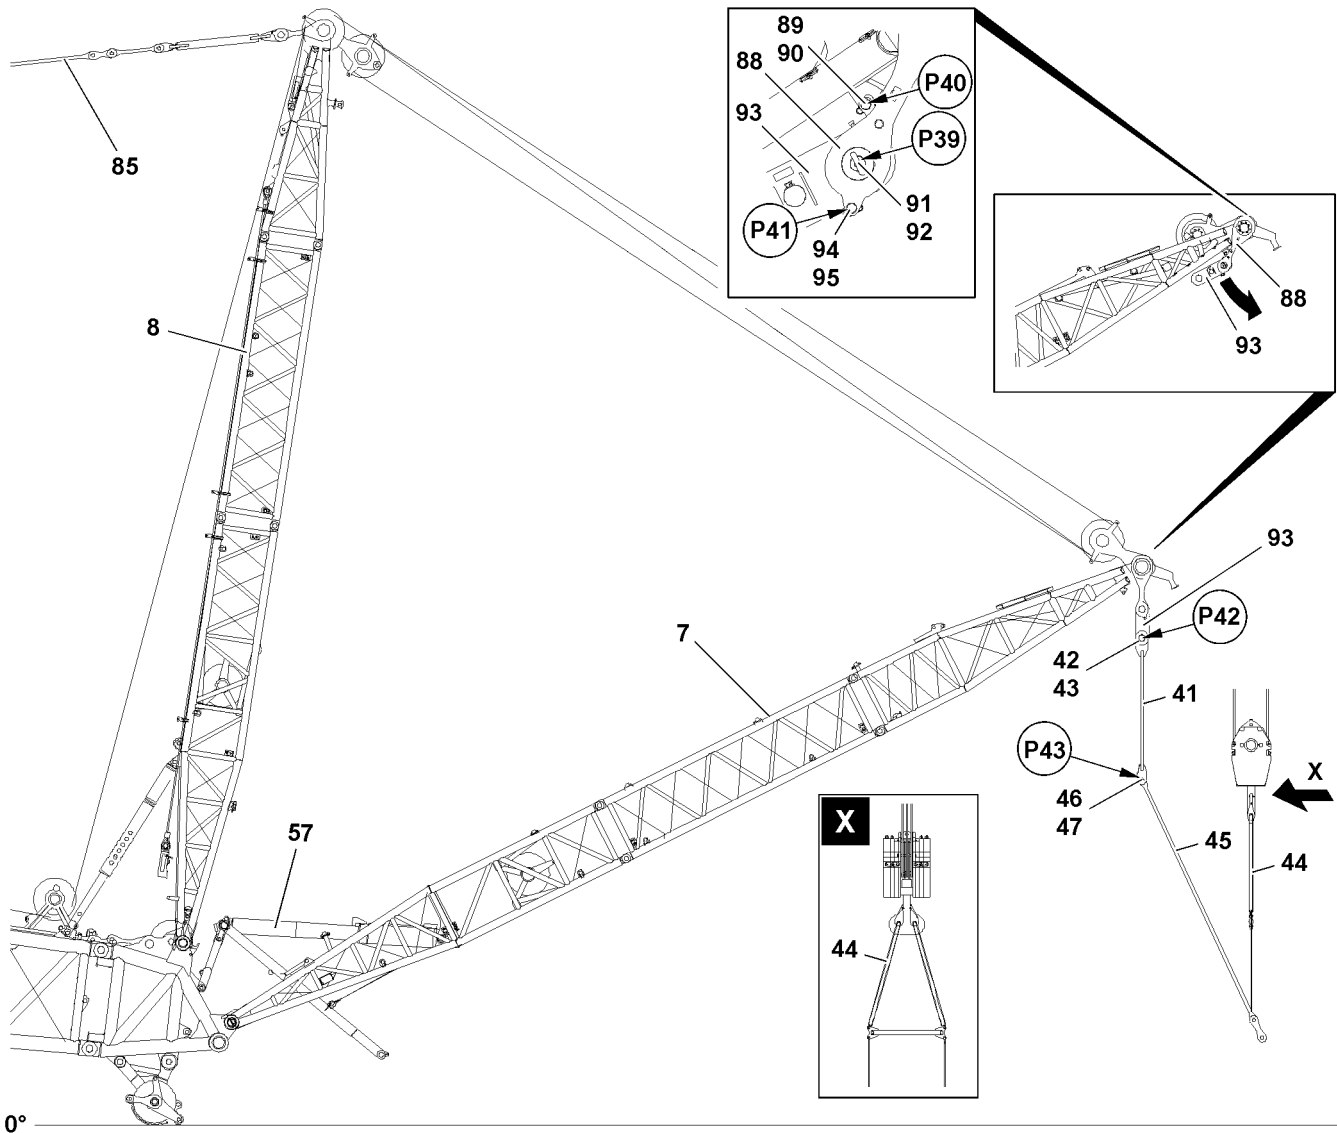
Assemble the W-guy rods on the WA-frame 1 end section
